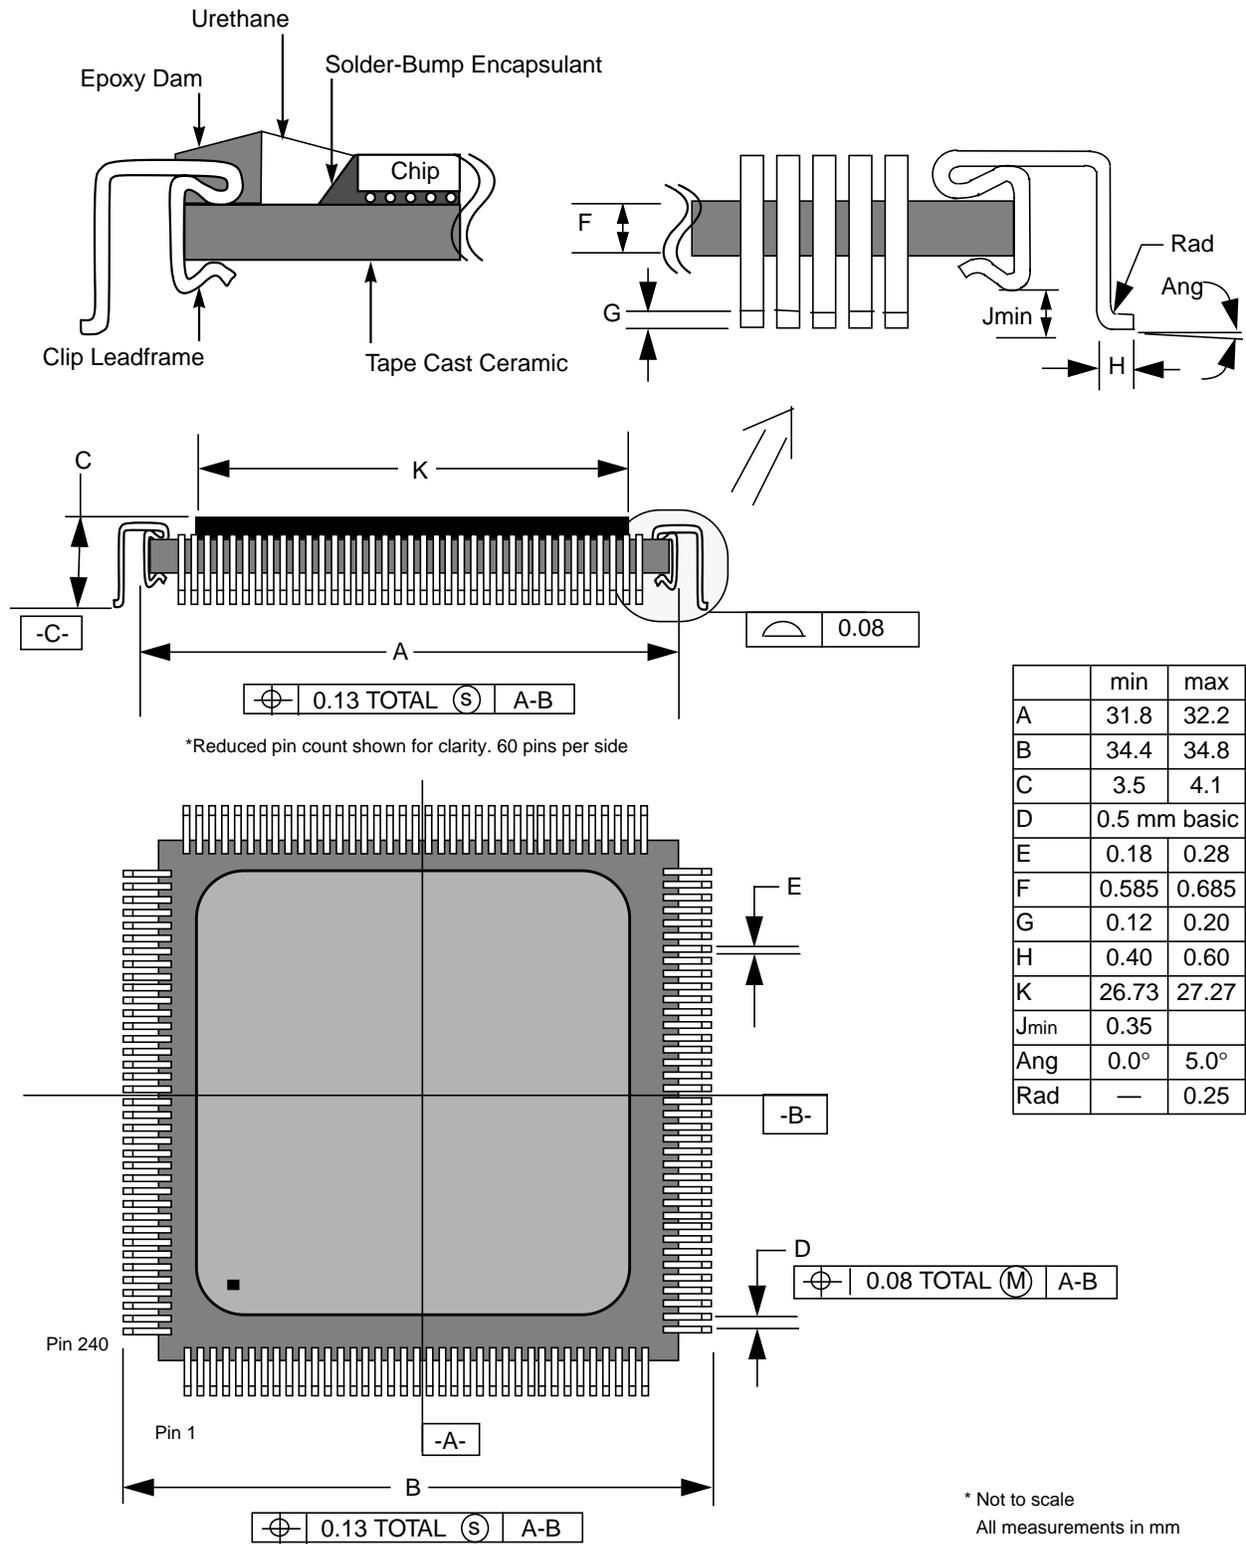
Mechanical Dimensions of the Solder-Bump C4FP Package W/O Cap
